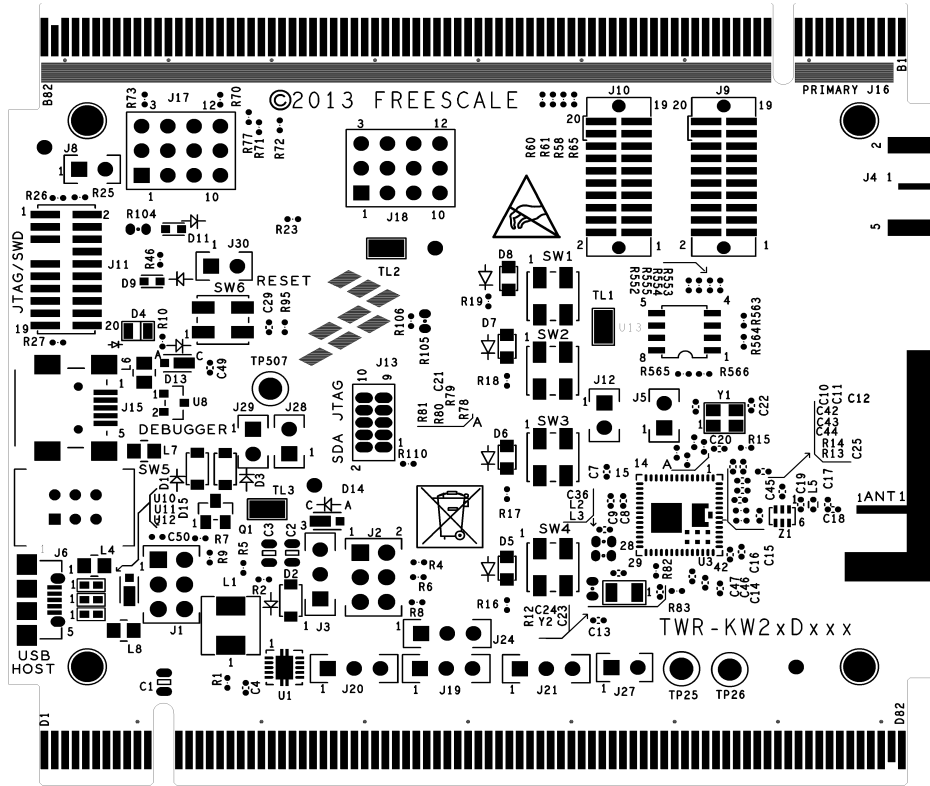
TWR-KW24D512 Reference Board PCB Component Location (Top View)
